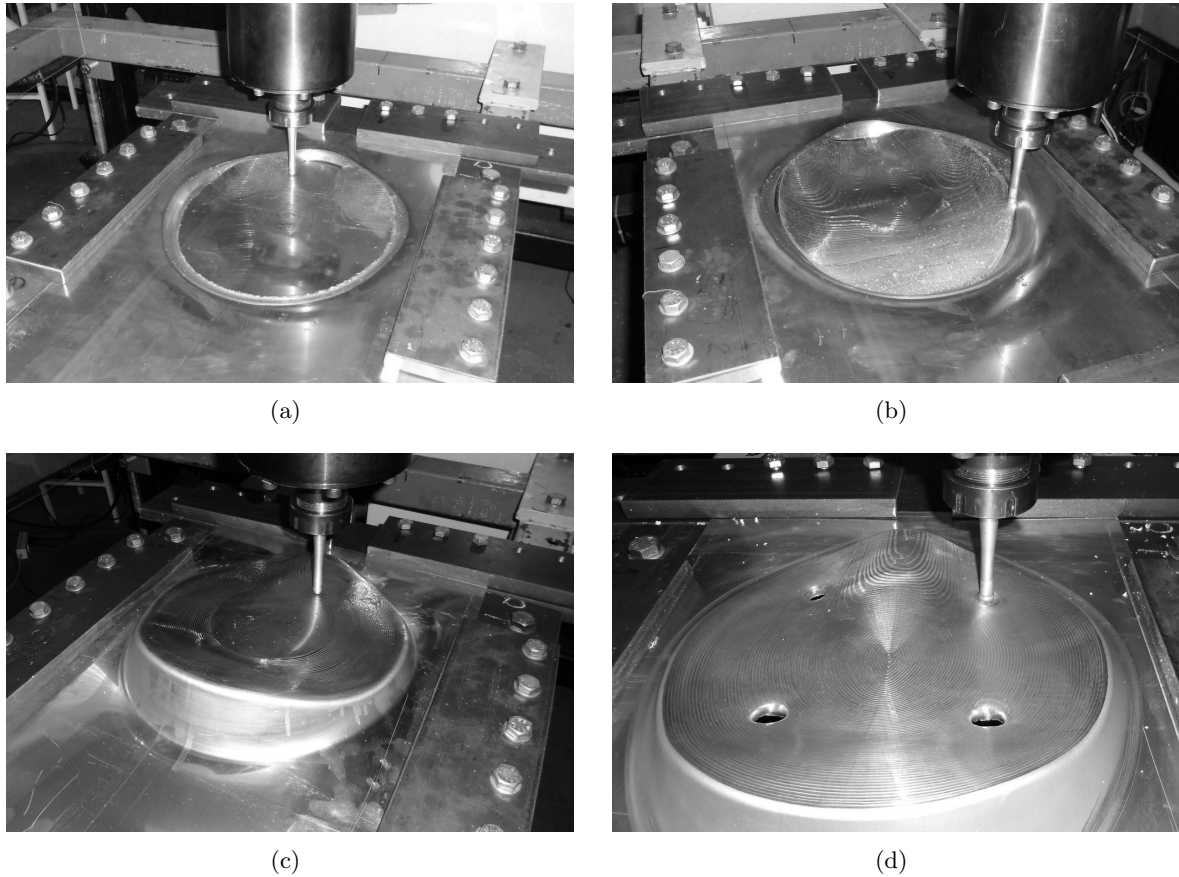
Stool seat forming: (a) underside forming, (b) fillet definition, (c) seat upper side shaping, (d) legs mounting flanging
